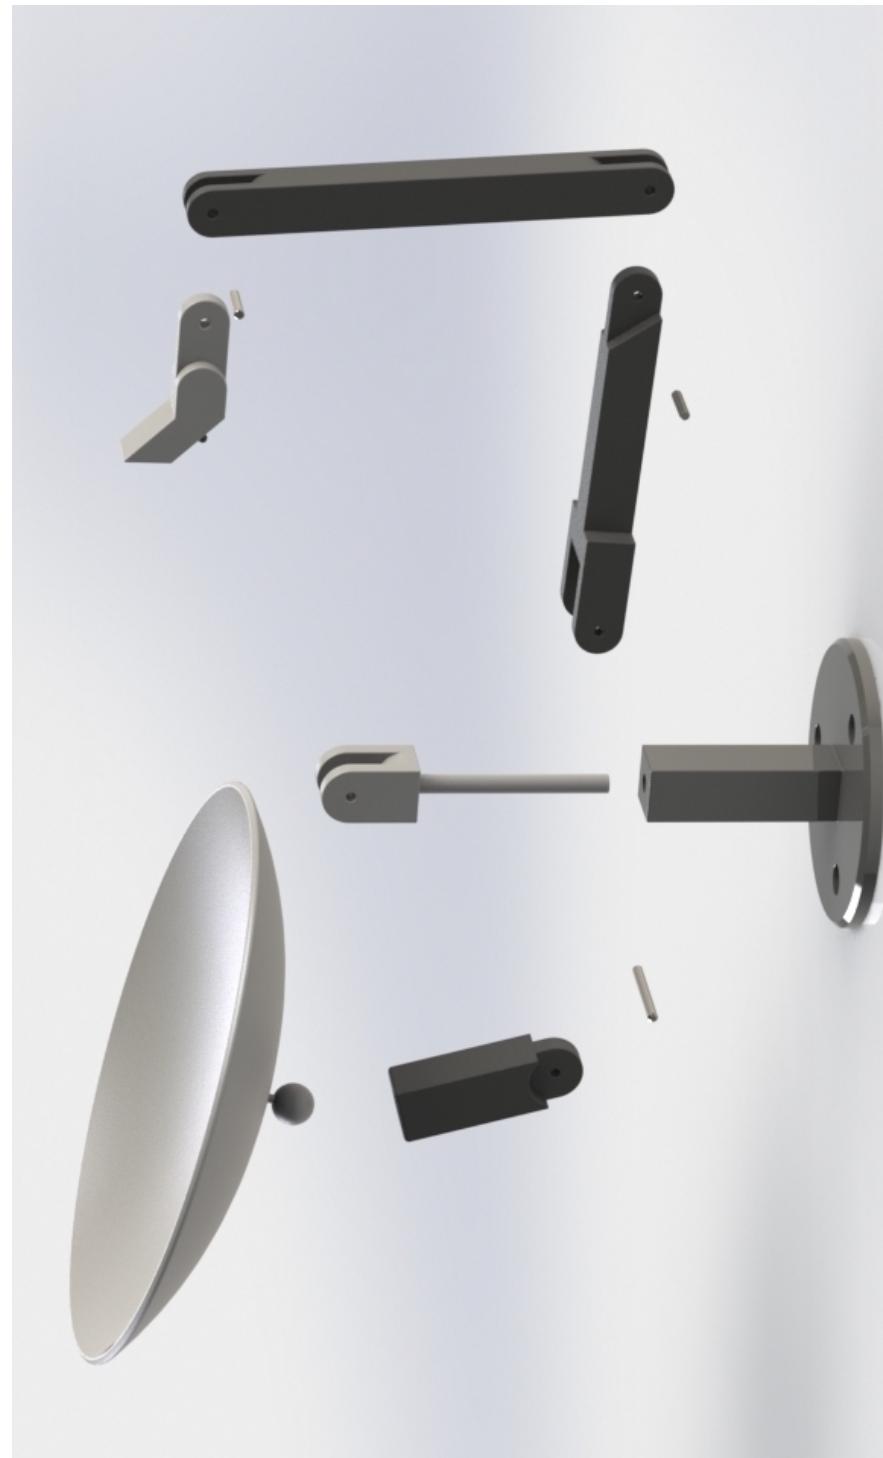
Rodriguez, Juan: Exploded View of Antenna Assembly
